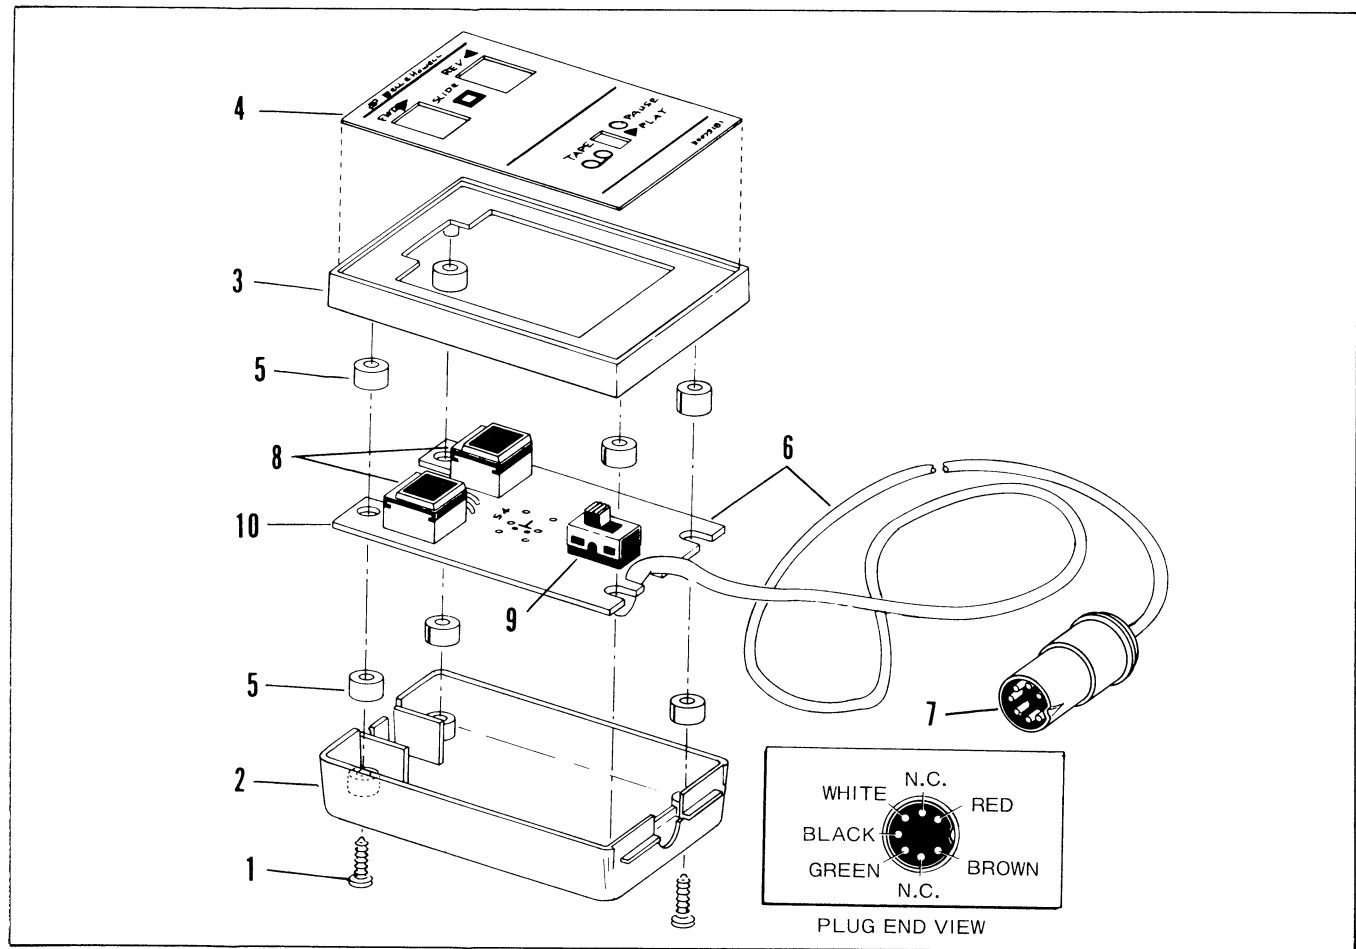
Optional Remote Control Accessory - Exploded View (All Except 850)
